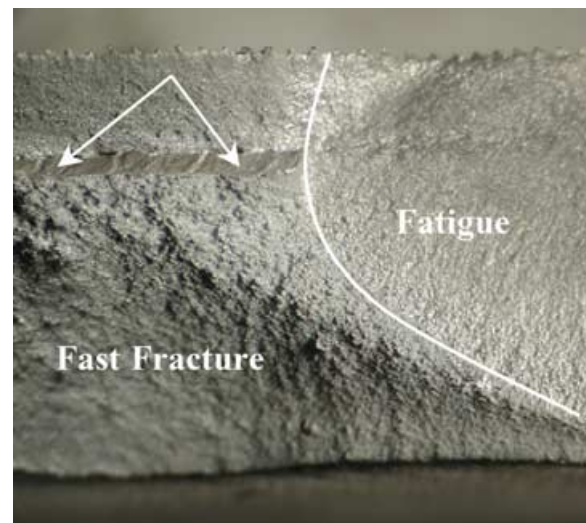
Optical fractograph of an 8 mm thick SP FSW fatigue specimen.
